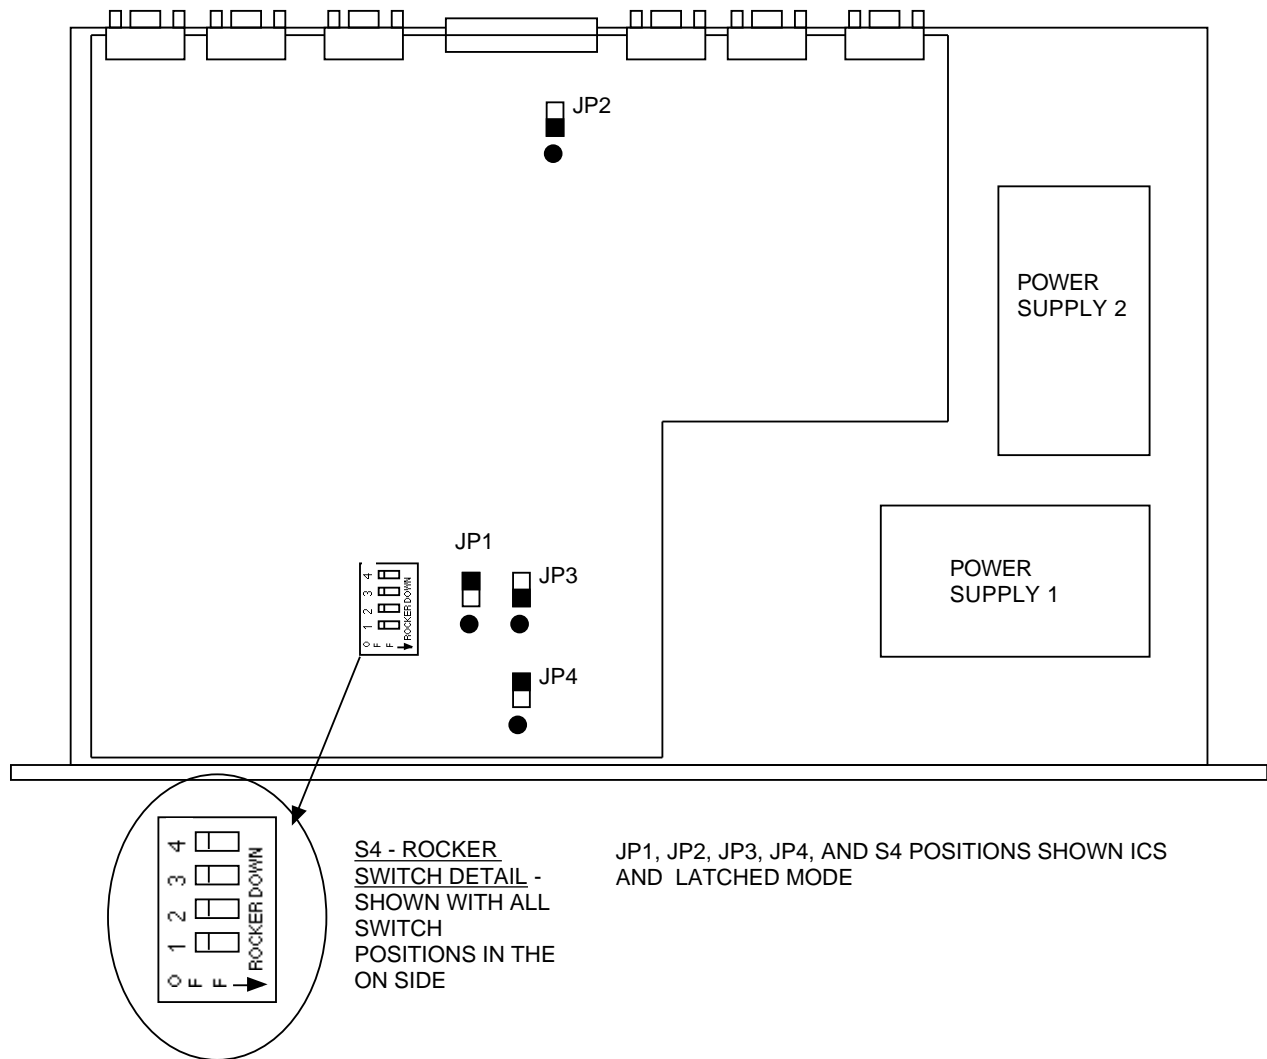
PCB SETTINGS PARTS LOCATIONS
